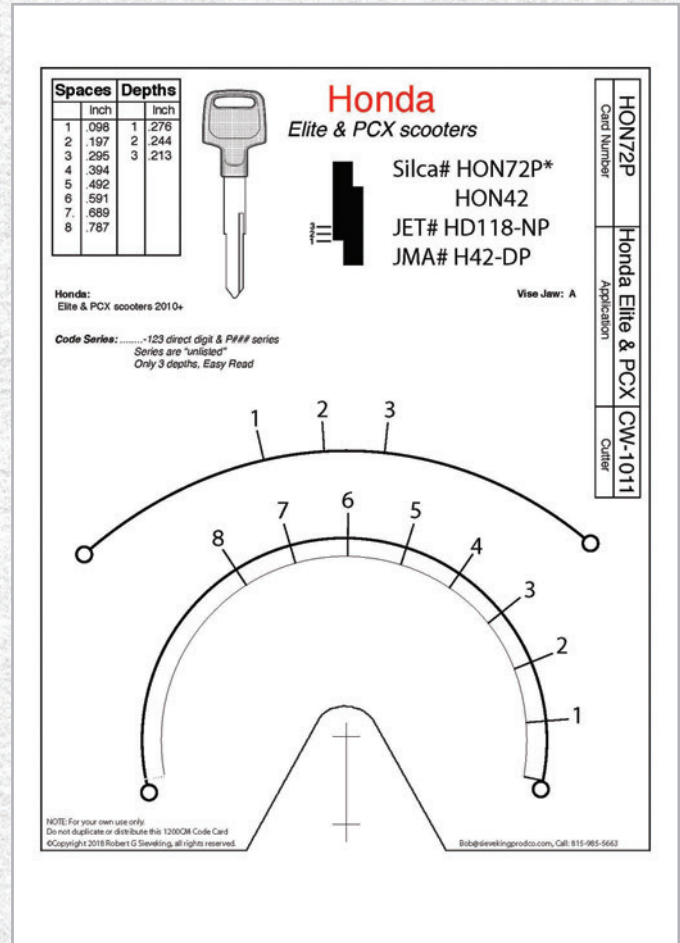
This illustration shows a 1200CM code card that can be used to generate this key.
